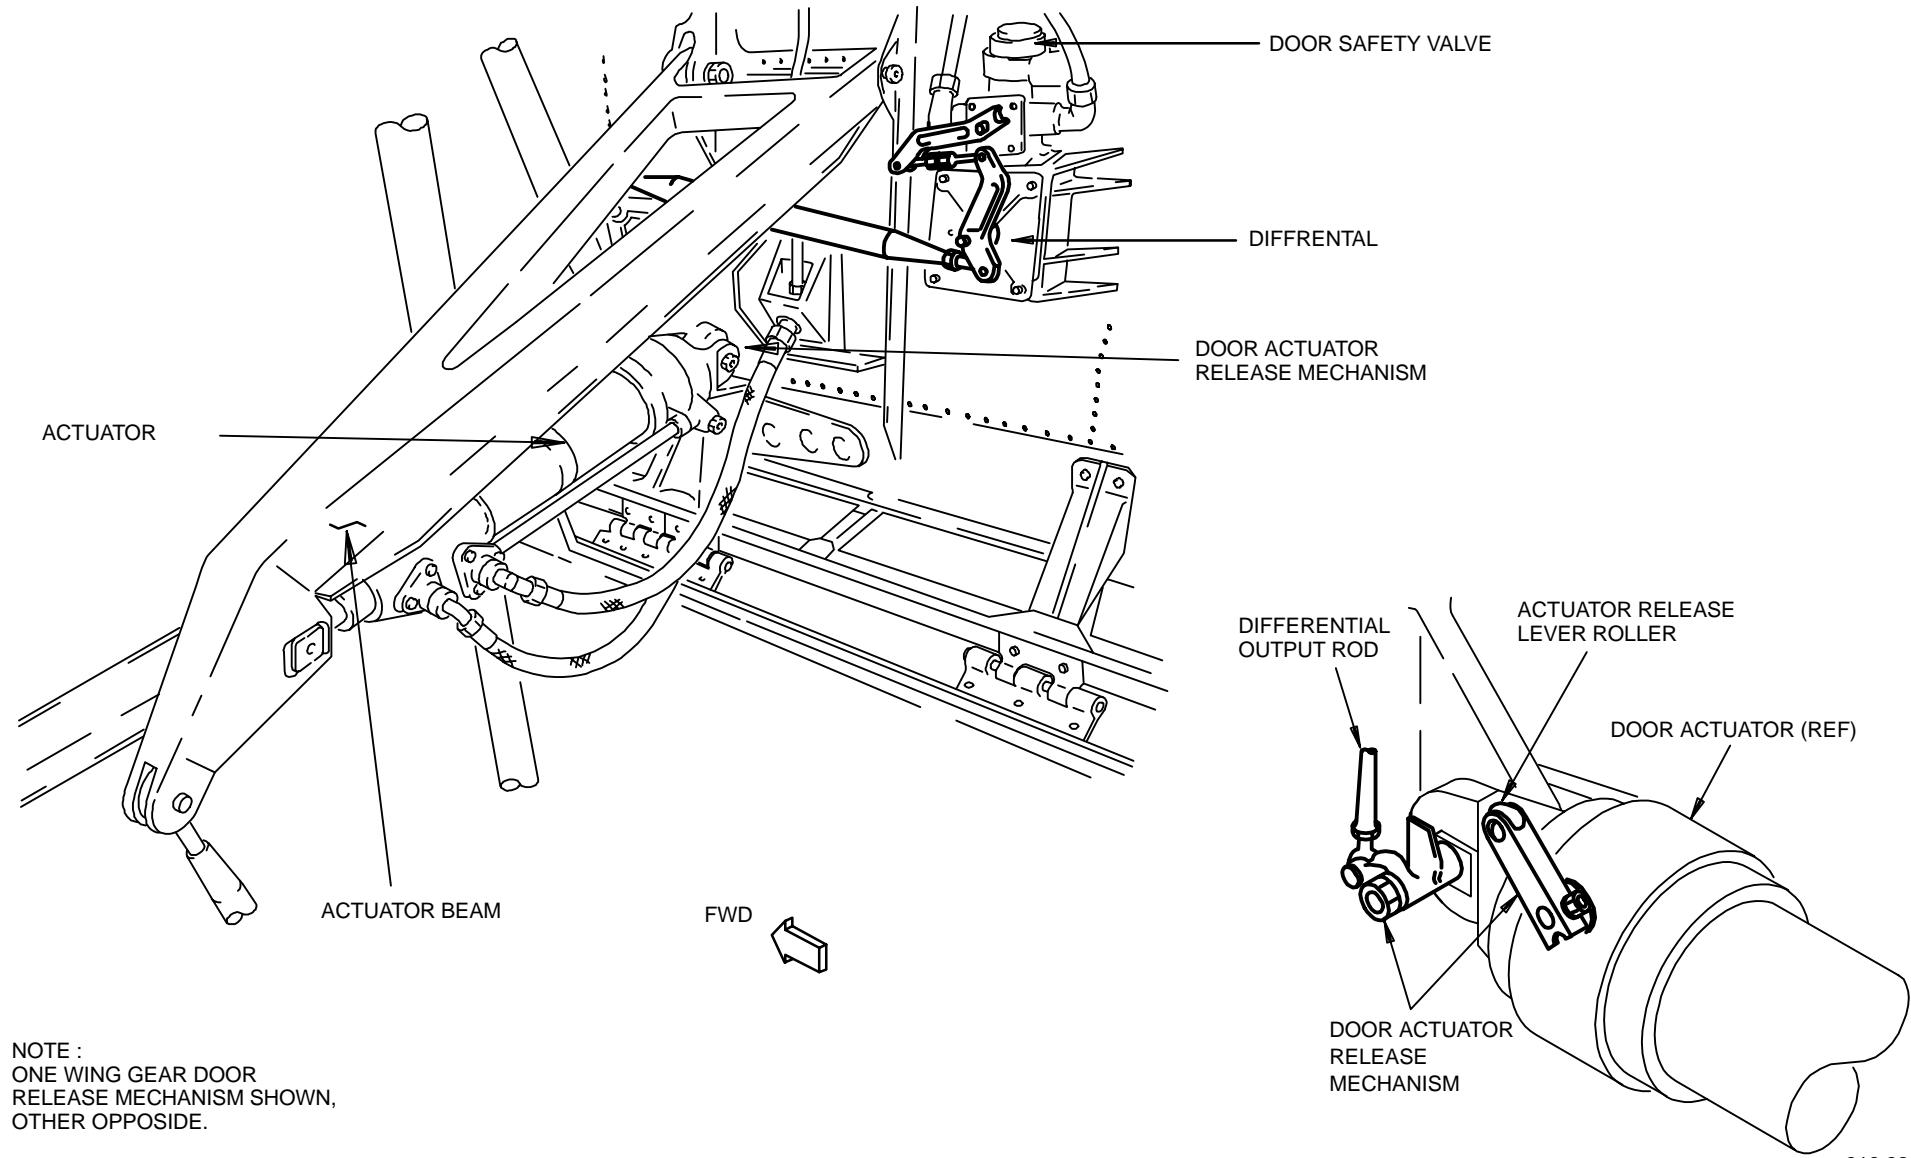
WING GEAR DOOR RELEASE COMPONENTS
